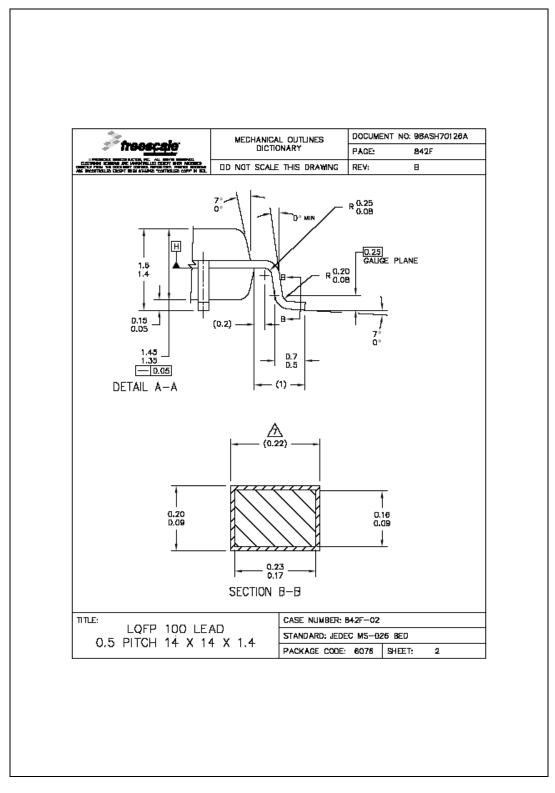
100 LQFP package mechanical drawing (Part 3 of 3)
